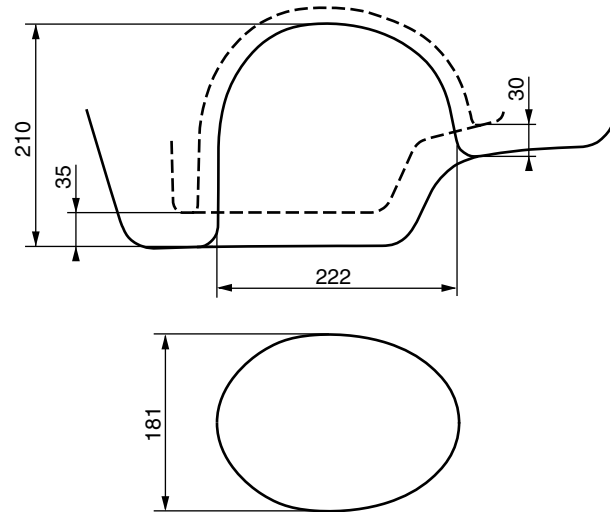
Main dimensions [mm] of the helmet-shaped lower end of the Dewar.
